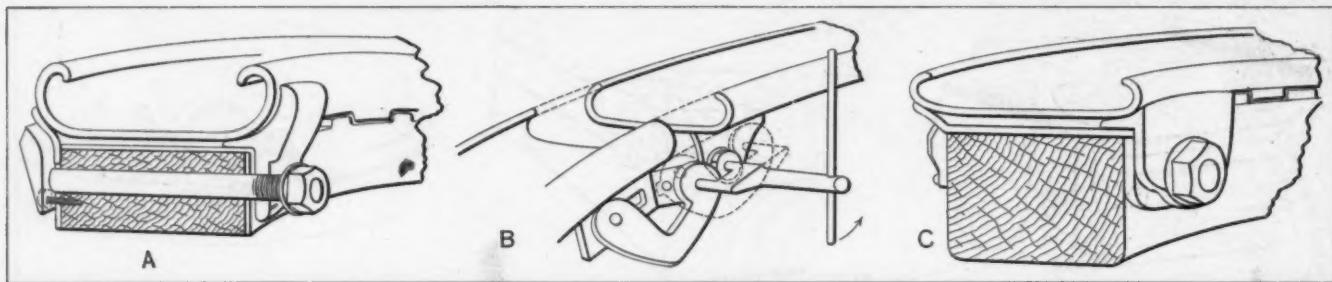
(A) Is a section of a Michelin demountable rim, (B) Shows method of locking the Universal demountable rim, (C) Offers the Continental demountable rim in section
